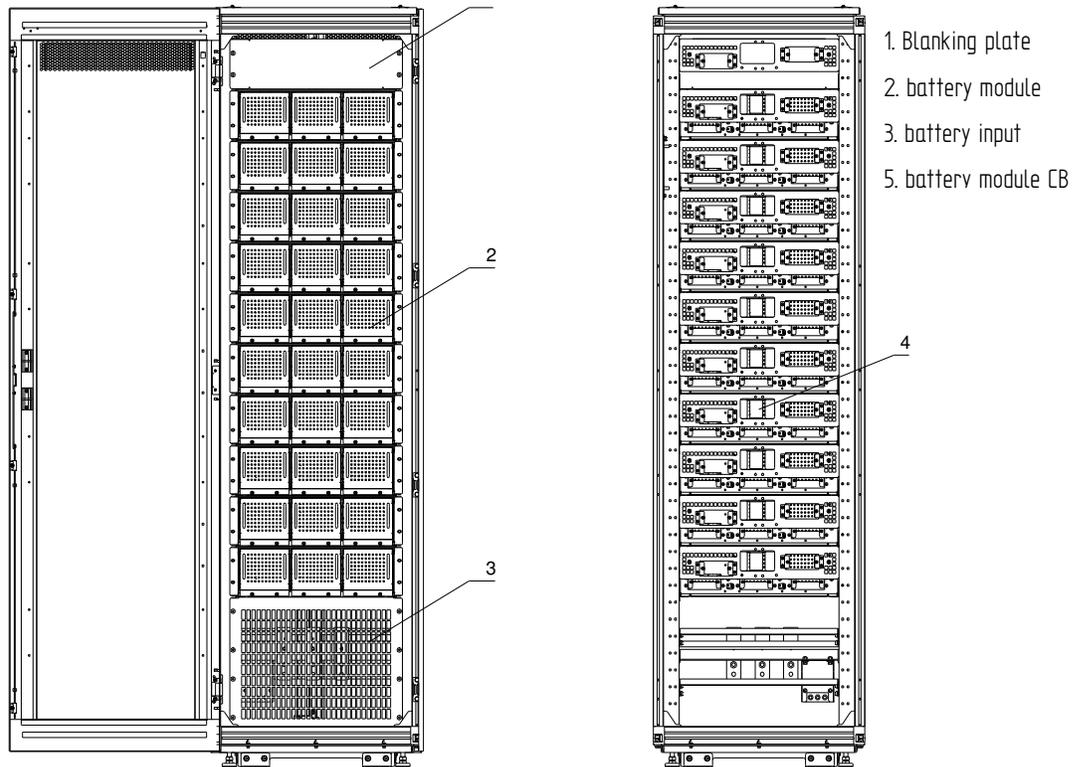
Modular Battery Cabinet: front view with open door and back view without doors
